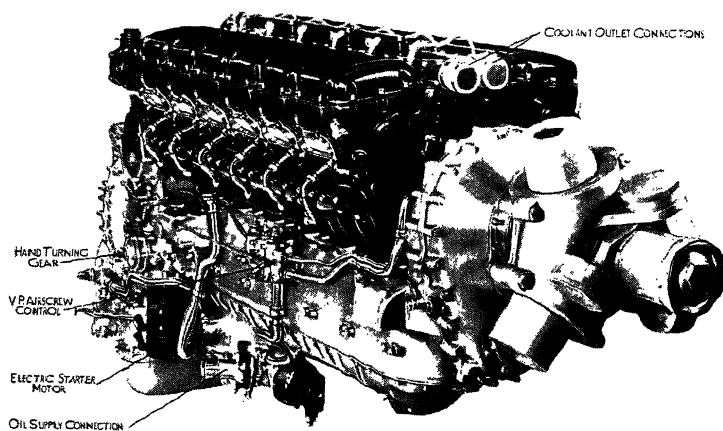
Three-quarters front end view of "Merlin" engine, showing starting gear, variable pitch airscrew and other details.
